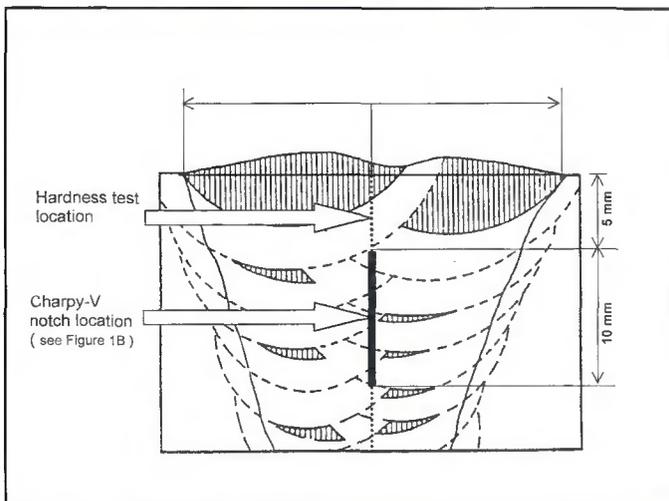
Schematic drawing of all-weld-metal test assembly cross section.
